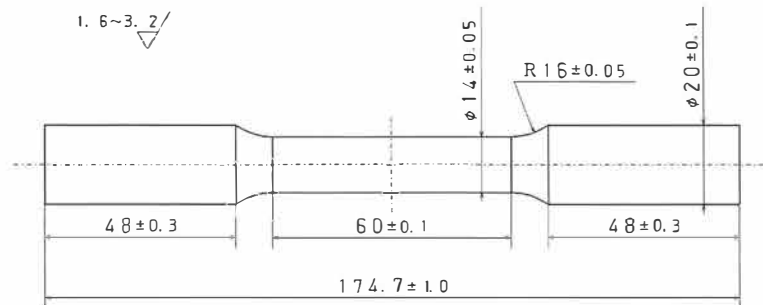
Tensile test piece shape and dimensions. (293K.)
